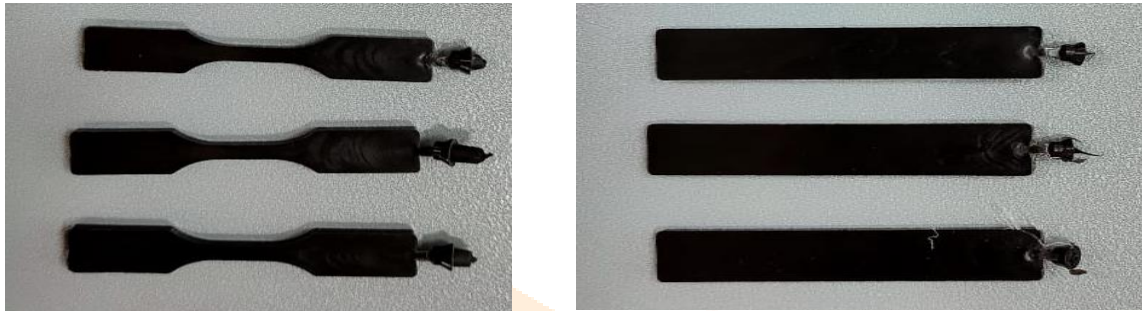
Tensile and impact sample prepared by micro injection moulding machine according to ASTM standard
